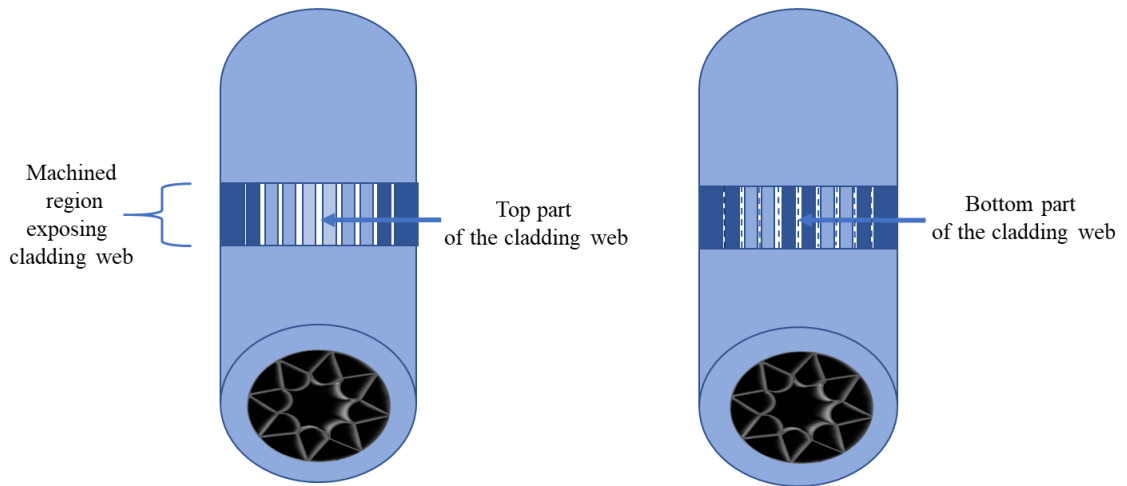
Scheme of the machining when the machining reached the top part of the cladding web a) and when the machining reached the bottom part of the cladding web b).
